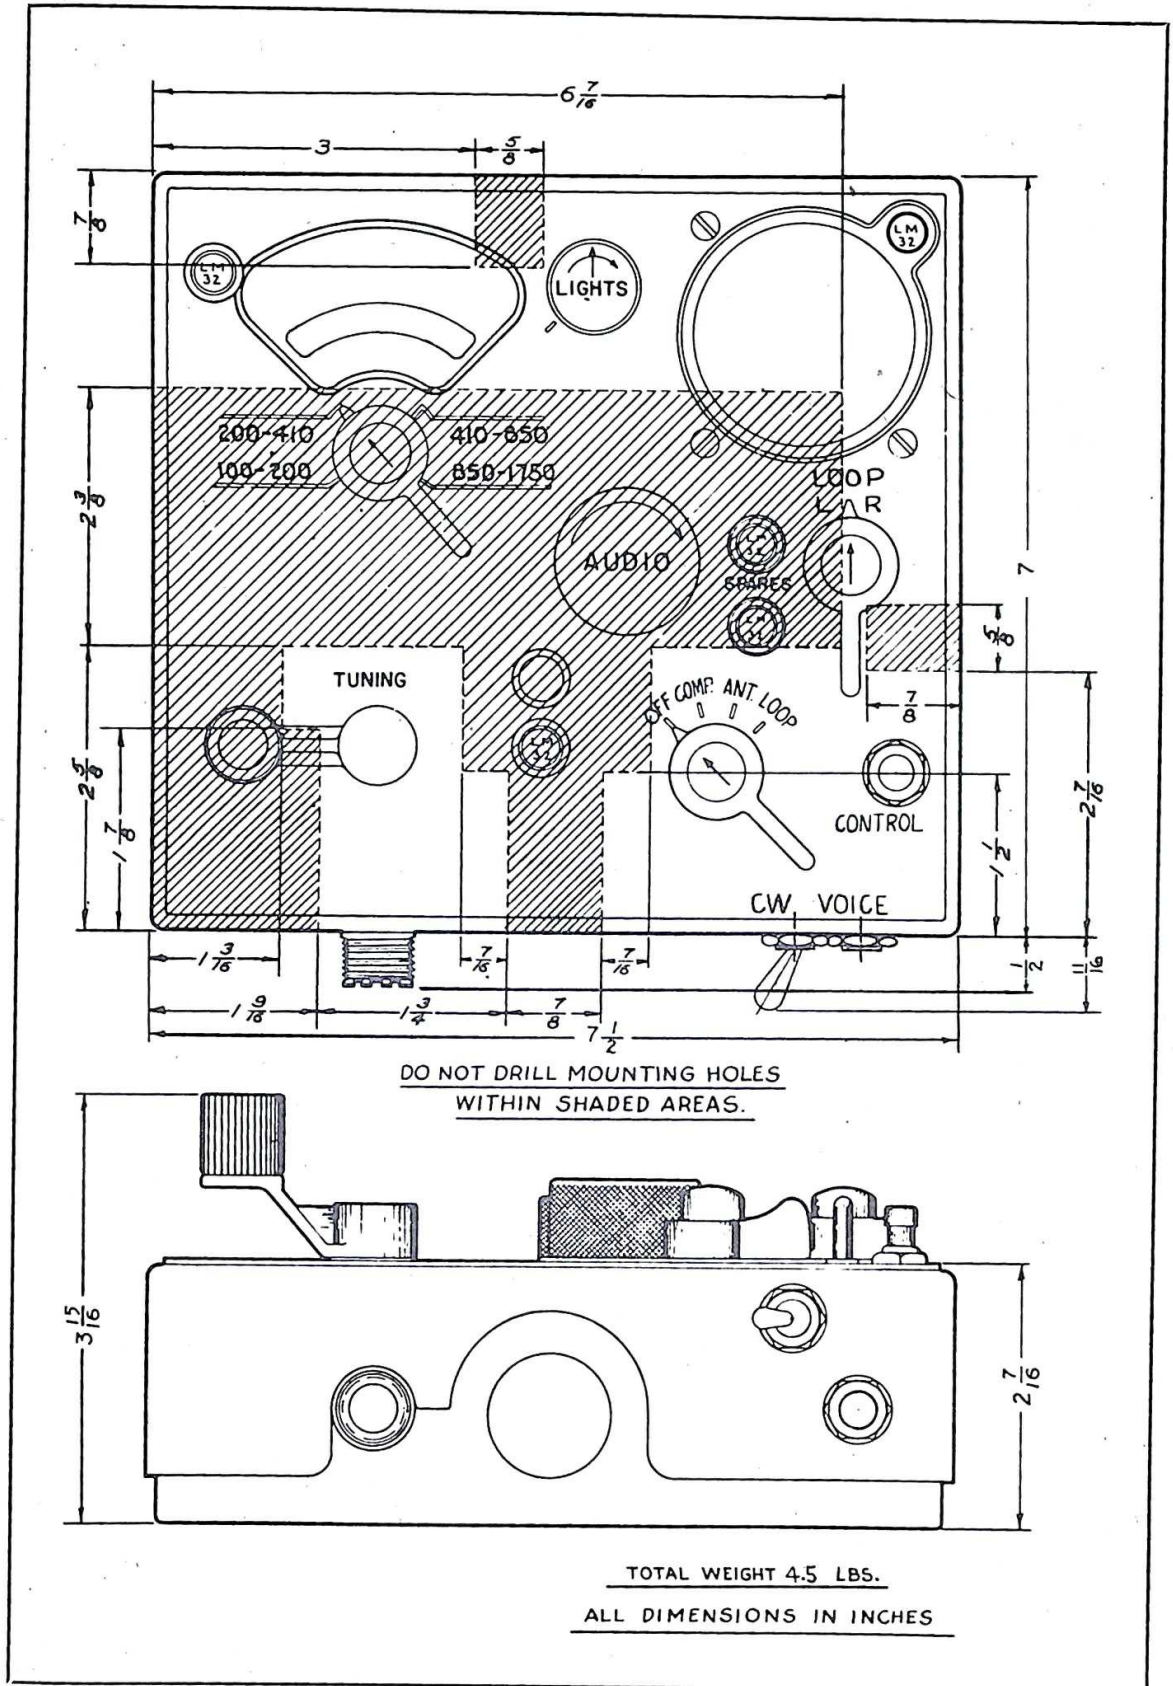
Radio Control Box ★C-4/ARN-7—Outline Drawing
